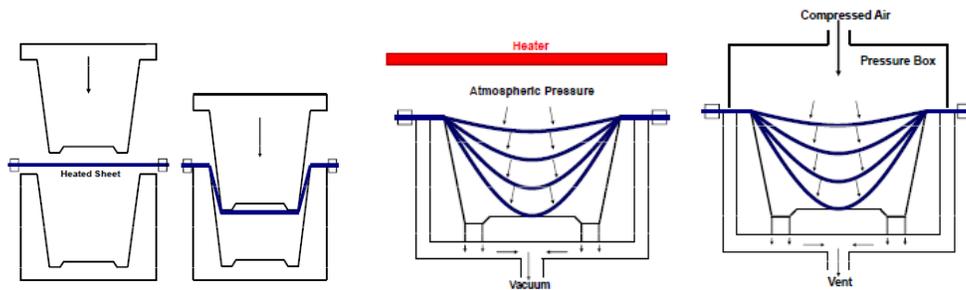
Mechanical(left), vacuum(middle) and pressure forming(right)[13].
